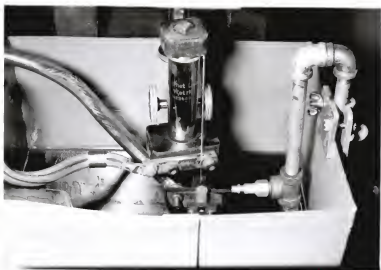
View inside of tank showing tool and workpiece electrodes, holding devices, and dielectric discharge jet.
